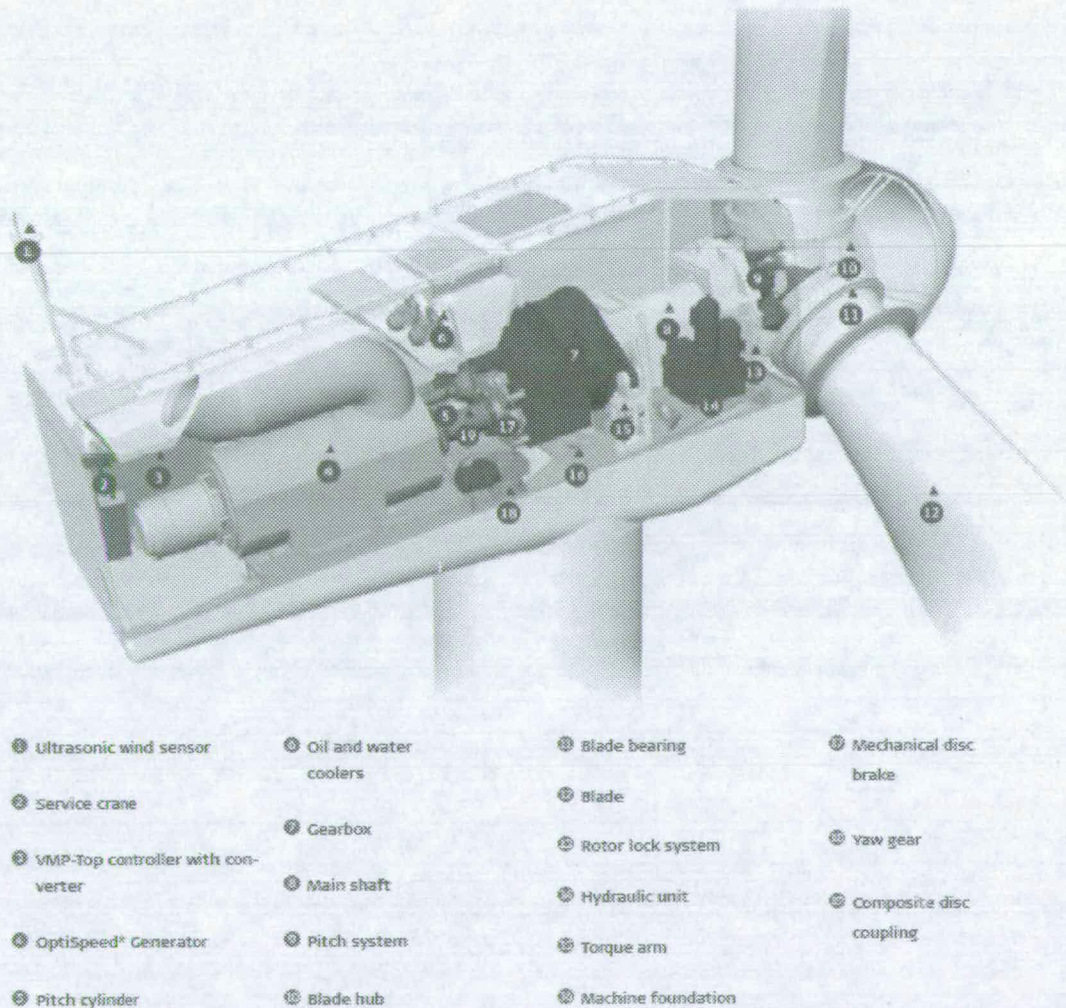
Typical wind turbine with drivetrain (Vestas V52) [127]
